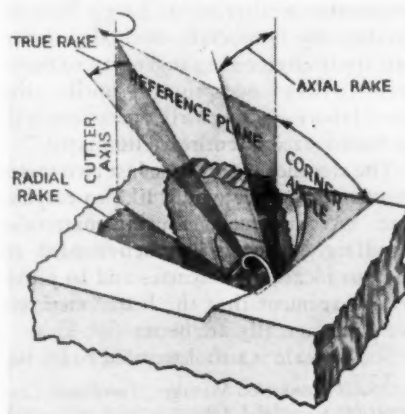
TRUE RAKE AND ITS COMPONENT ANGLES ON METAL-CUTTING TOOLS
